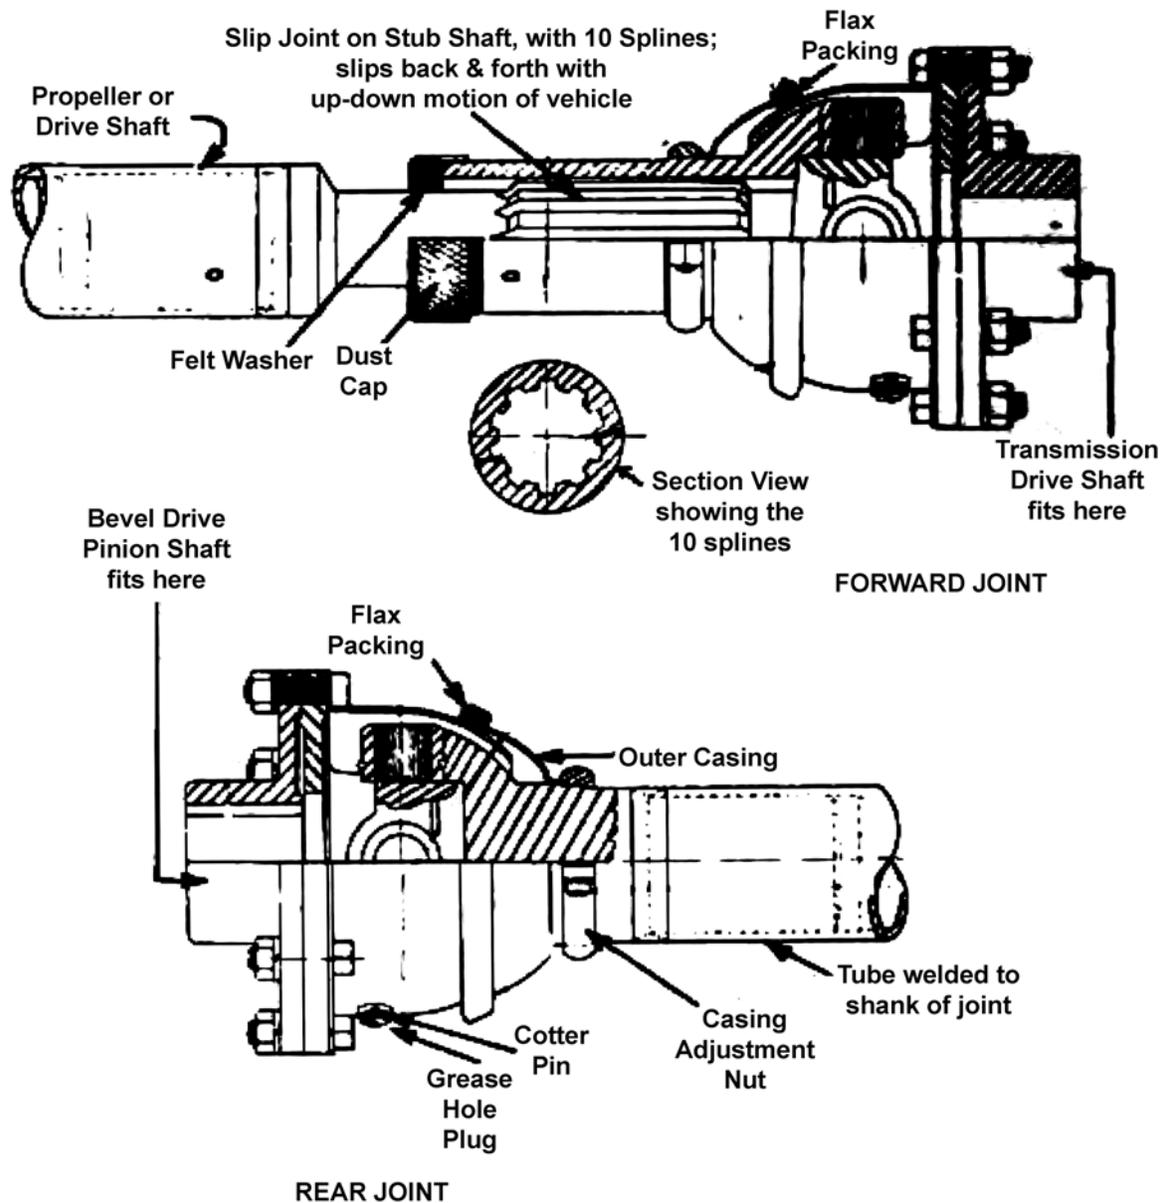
HALF SECTION DETAILS OF SPICER UNIVERSAL JOINTS
